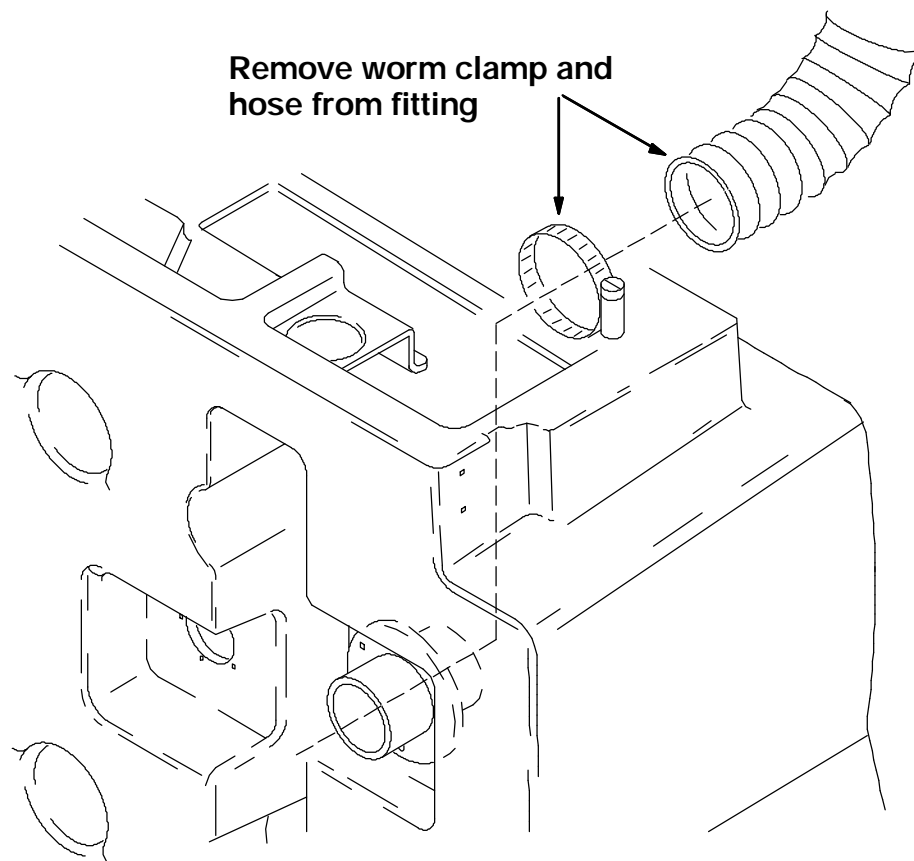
Remove Worm Drive Clamp And Hose From Fitting Inside Tank
